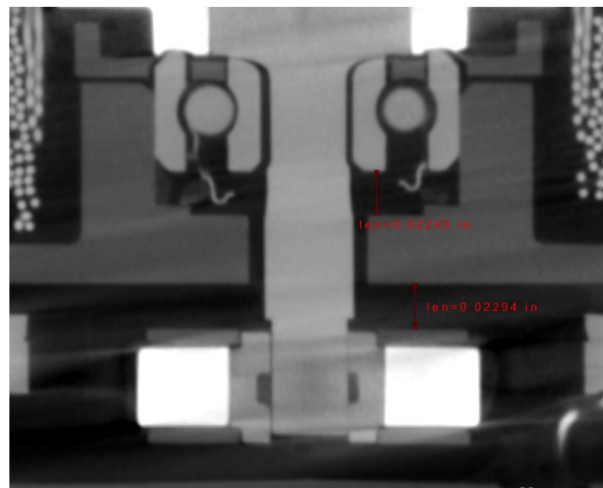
Life Test Motor Showing Shaft Wear and the Bearing Having Moved Toward the Rotor. The Ball Retainer is Seen Located Under the Bearing Assembly. (0.0229 in = 582 microns)
